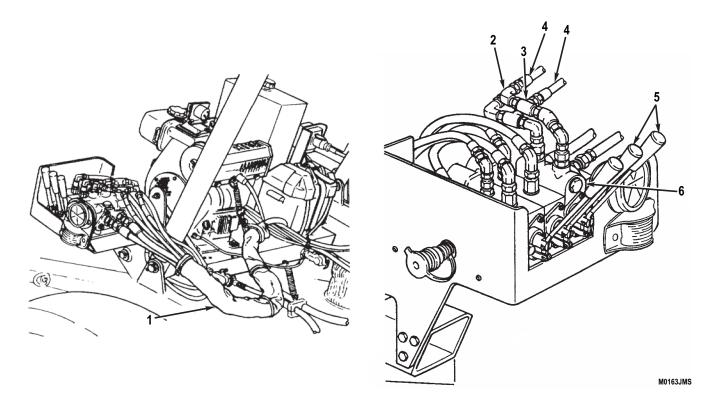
Hydraulic Control Valve-to-Hydraulic Positioning Cylinder Hose Assemblies.
